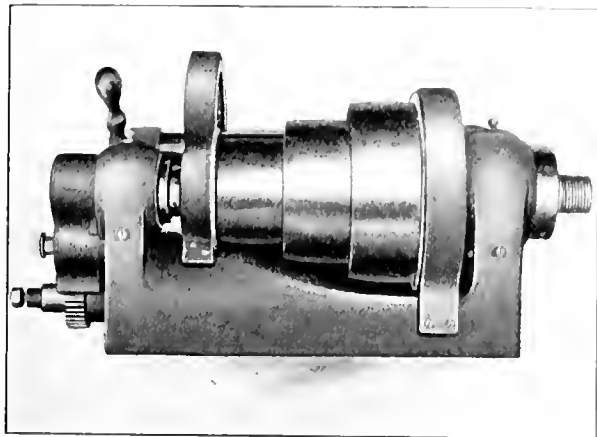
Headstock Fitted with Three-step Cone for Wide Belt.
